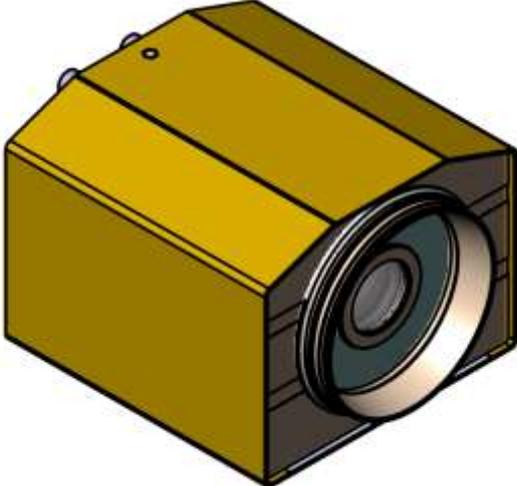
3D CAD illustration of the CoatMaster in-line measurement and sensor head
